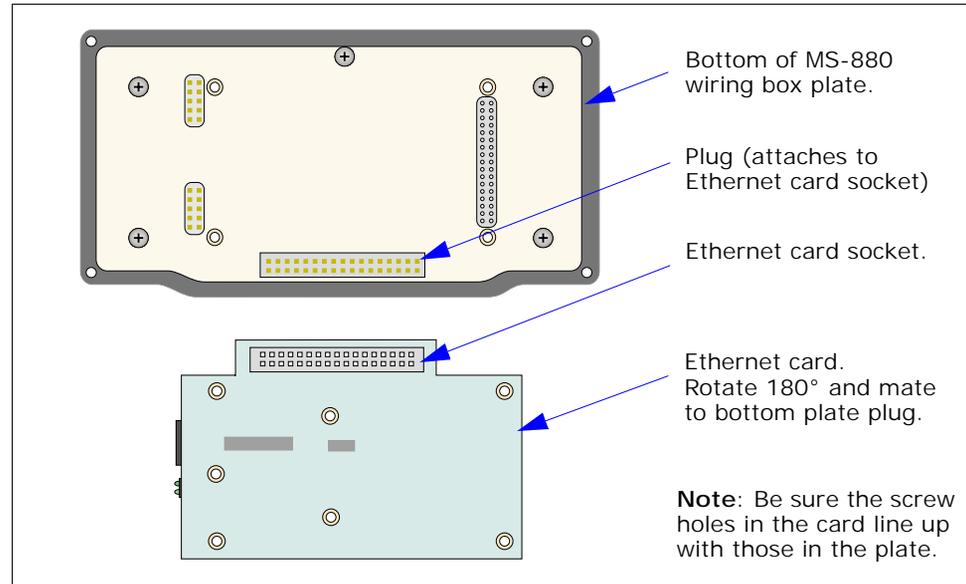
Bottom Plate and Ethernet Card (unassembled)
